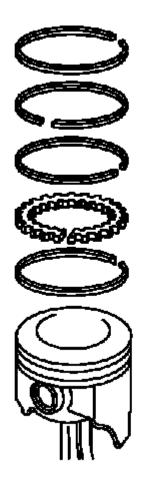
Exploded View Of Piston Rings Courtesy of GENERAL MOTORS CORP.
